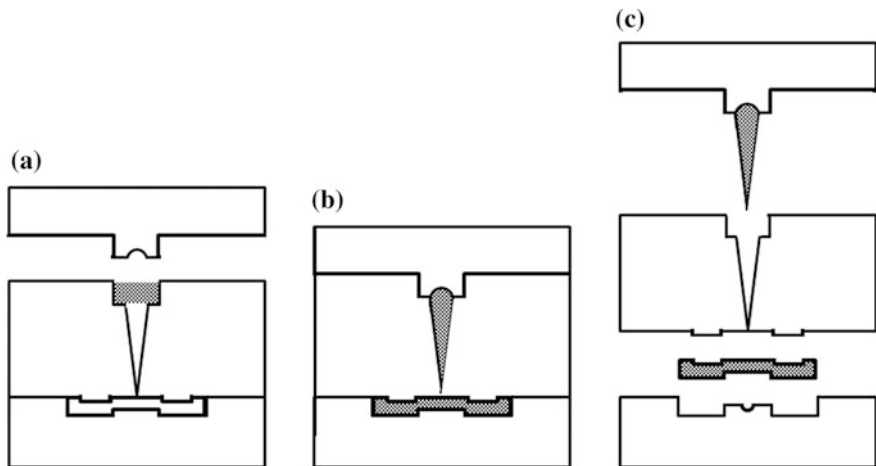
Transfer molding: a plug of molding compound inserted; b press closes; compound transfers through runners to mold cavities; c three-plate assembly opens; moldings recovered from lower daylight, sprue is withdrawn with top member
